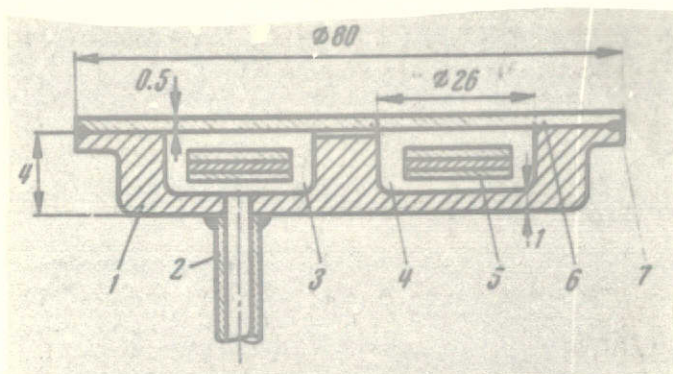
Container for isothermal annealing of samples: 1. housing; 2. tube; 3. chamber I; 4. chamber II; 5. samples; 6. membrane; 7. seam.
